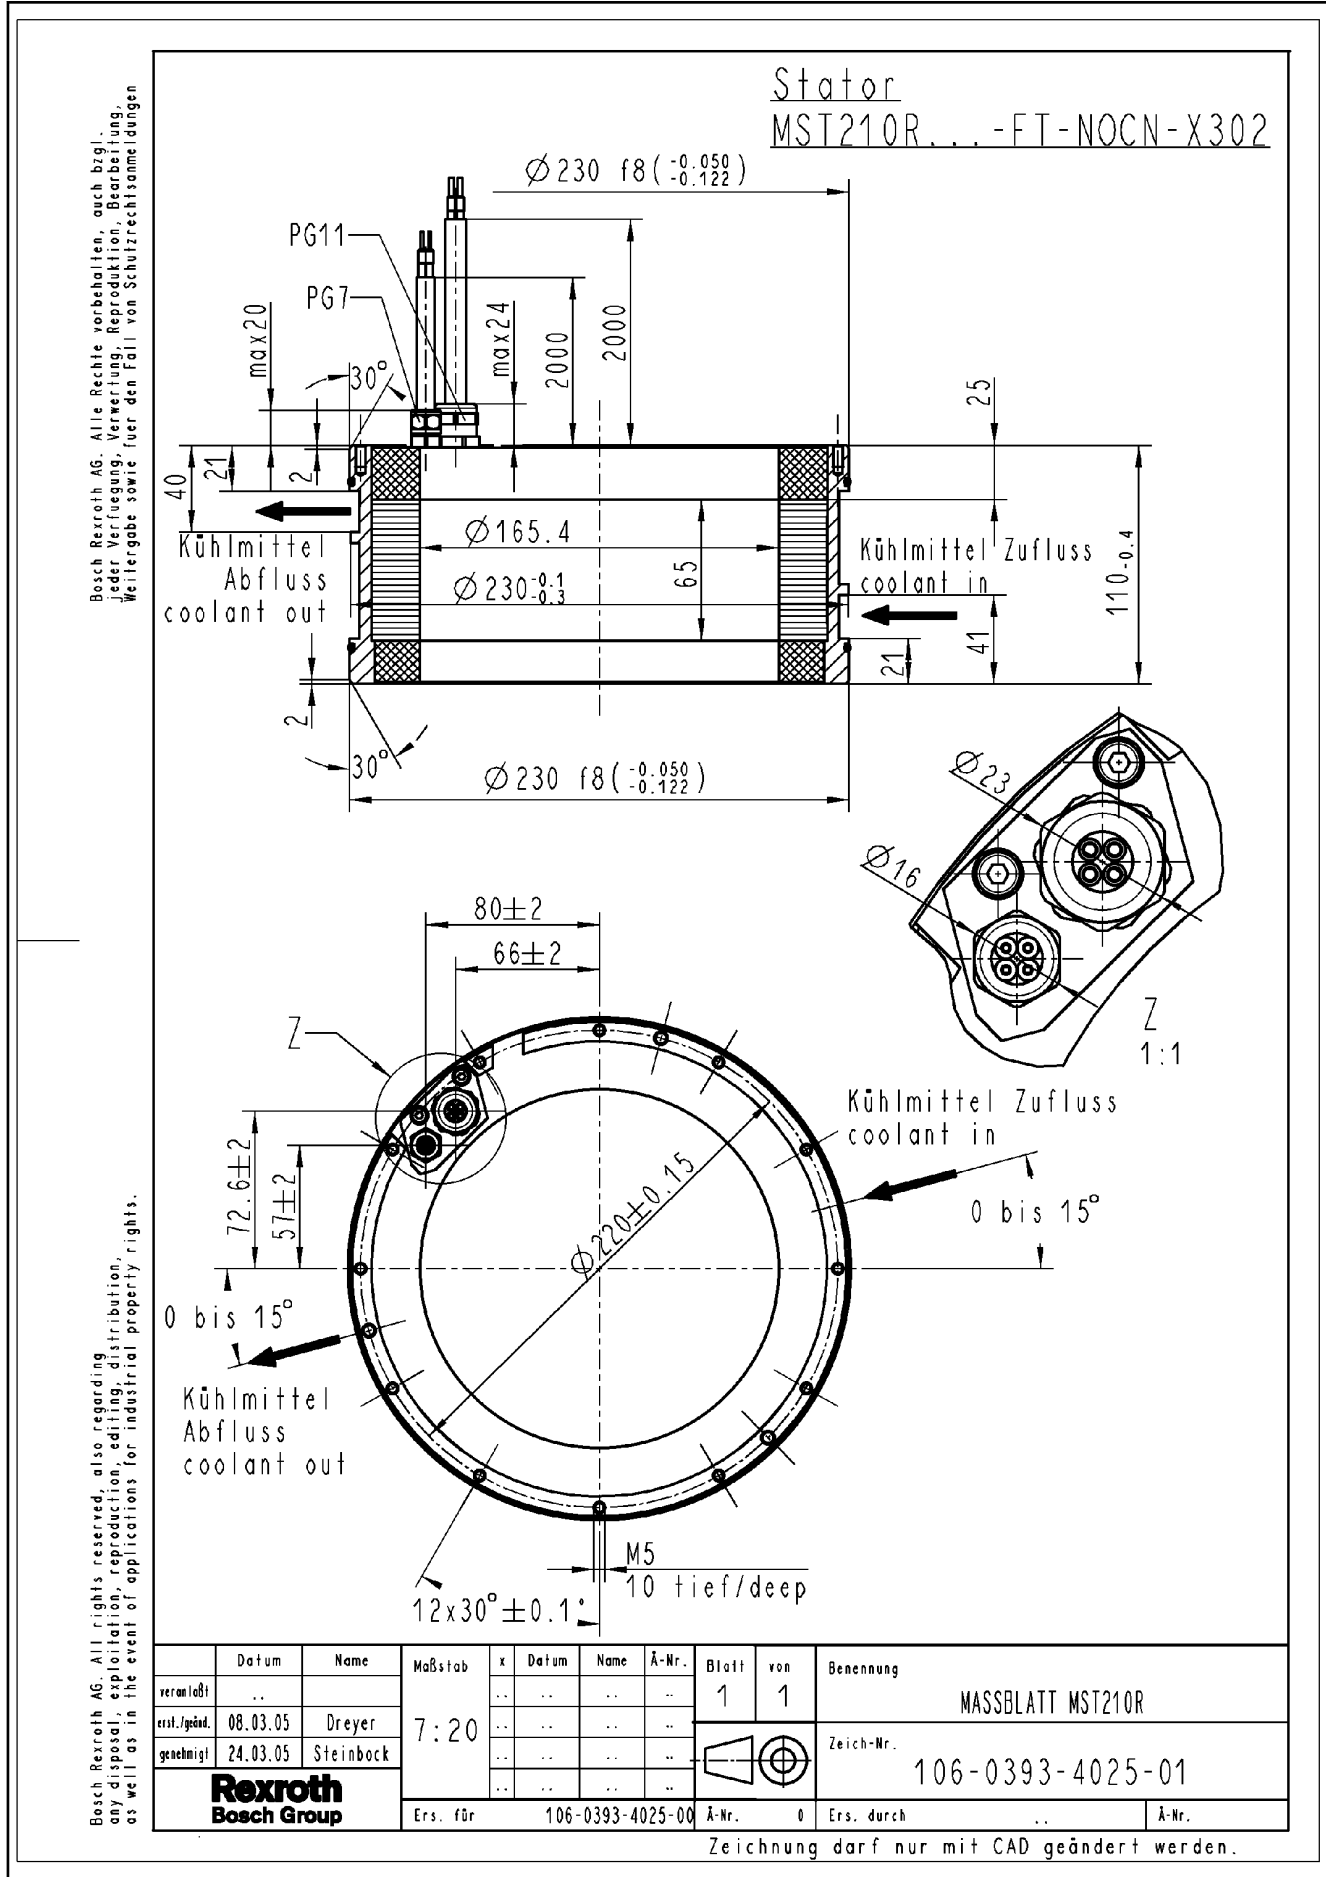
Dimension sheet for stator MST210R (design "X302")
